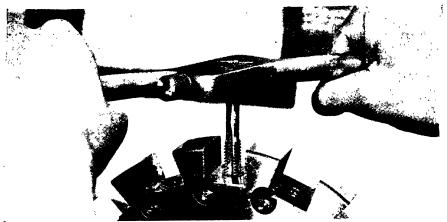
CUTTING A FEMALE THREAD WITH A TAP
